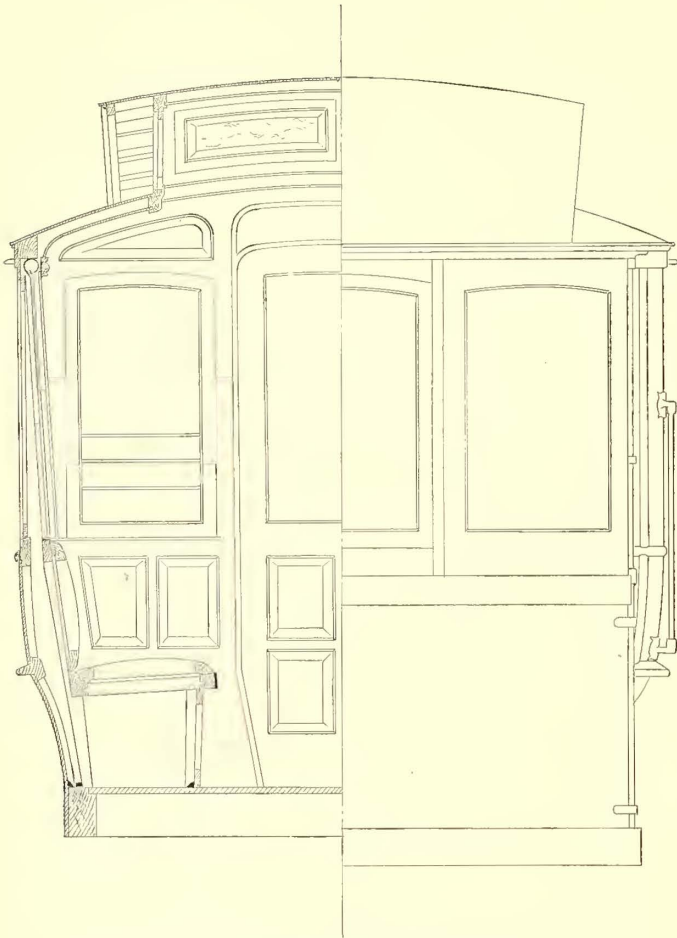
HALF SECTION AND END ELEVATION OF OLD-STYLE CAR
